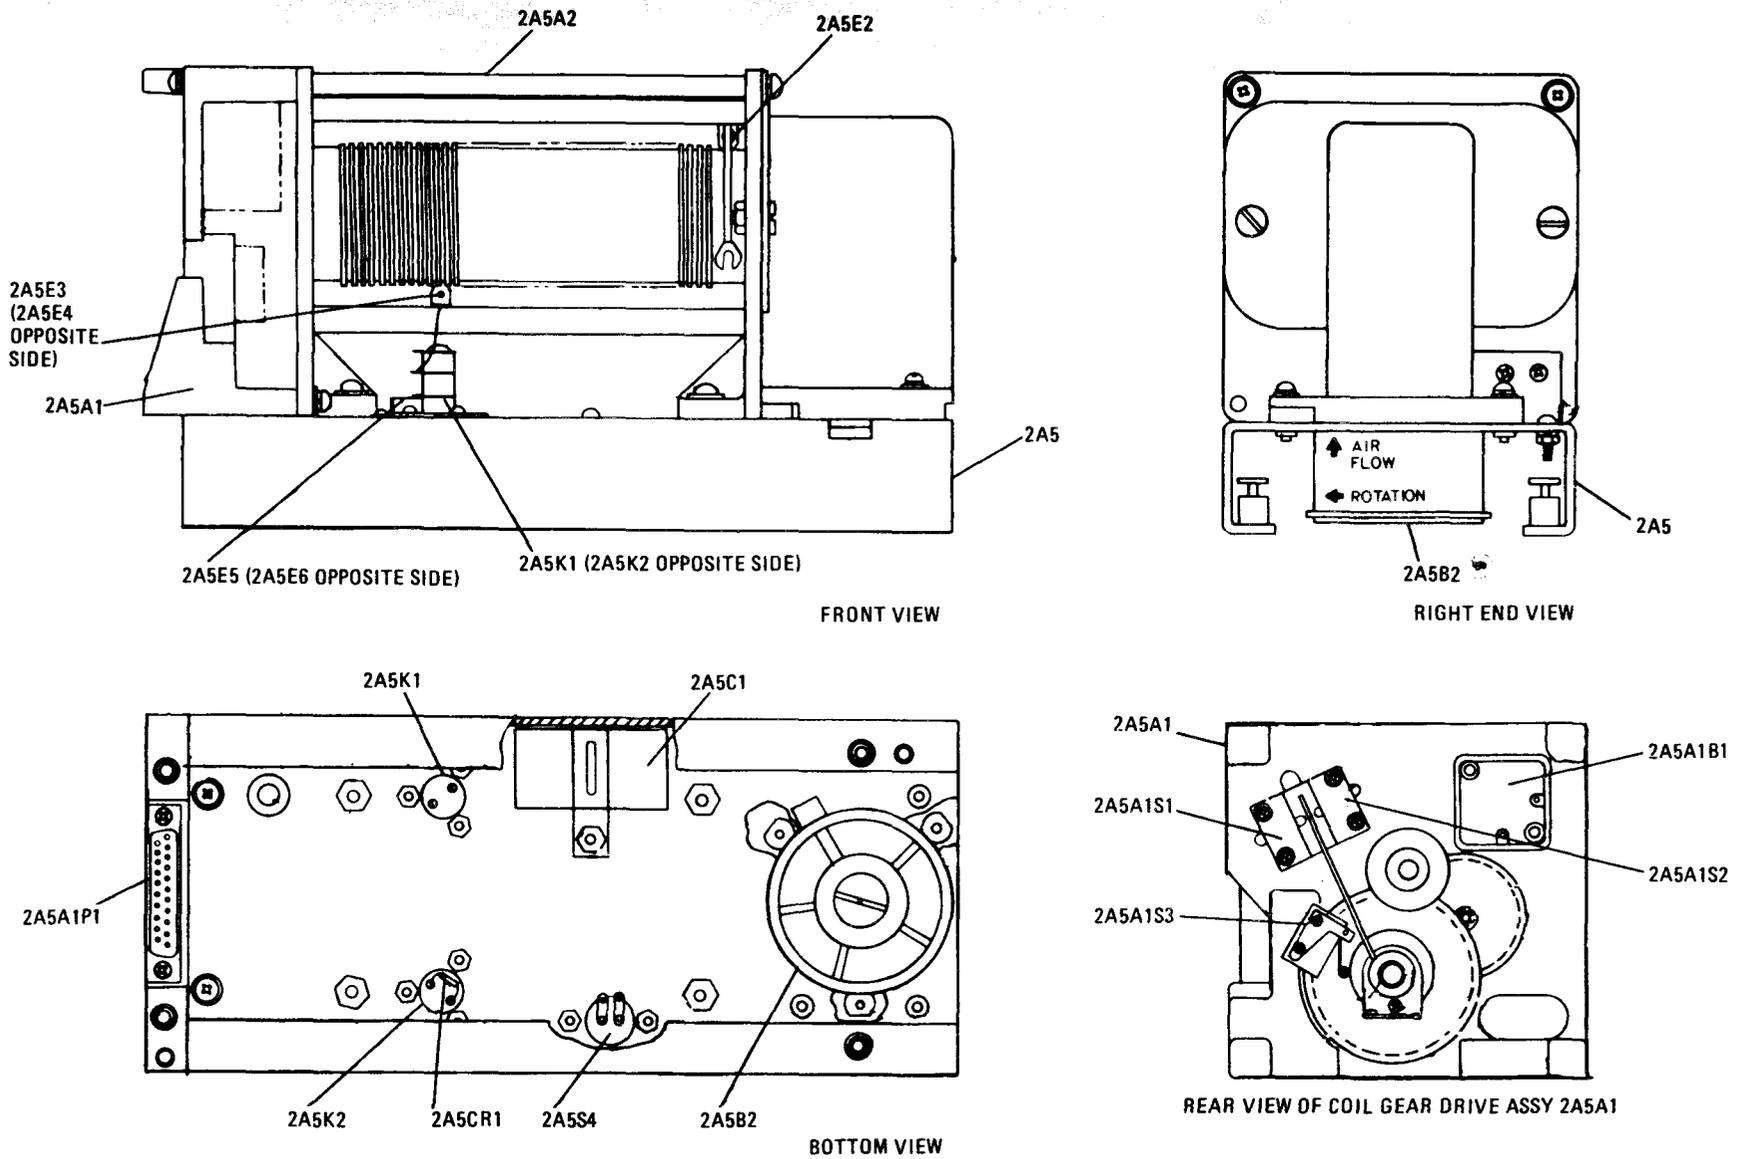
Inductive RF Tuner Assembly 2A5 Component Locations
